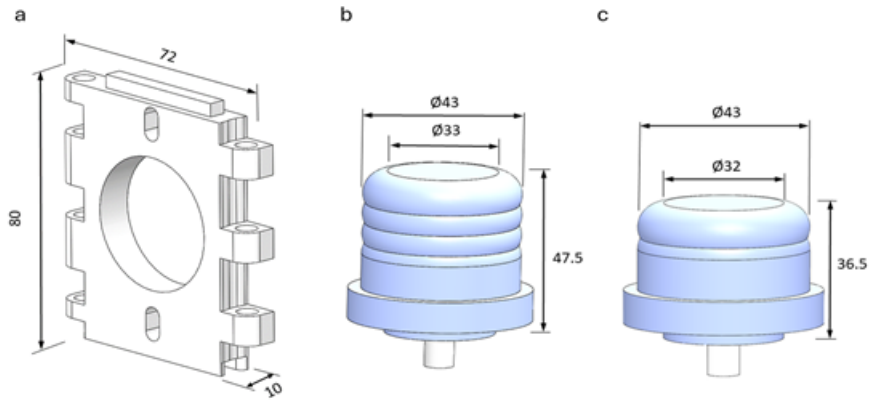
Main parts of a single soft gripper module with the two types of actuators. (a) Rigid structure. (b) 4-bellows actuator and (c) 2-bellows actuator. All dimensions are in mm.
